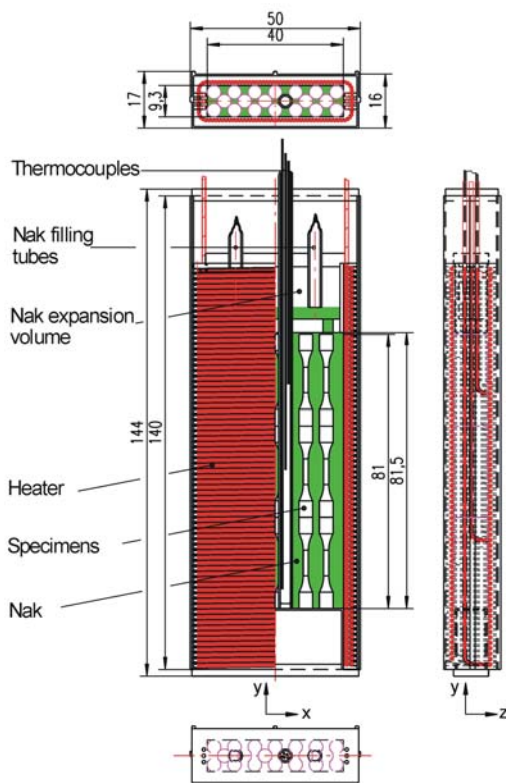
Capsule with specimens, triple heater system and thermocouples.
